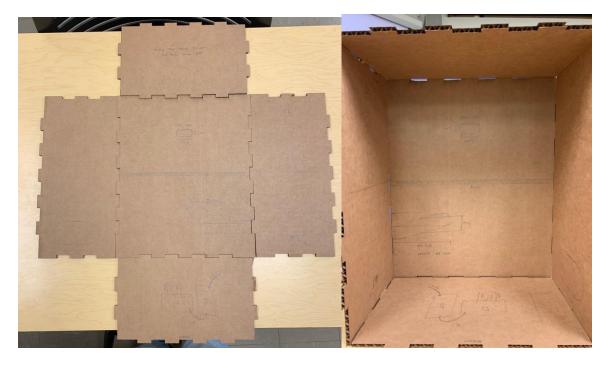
Our first box prototype on cardboard, simple box with finger joints created based on the approximate size we wanted Willy to be. This is where we sketched out where components would rest, and where holes for external components should be placed.
